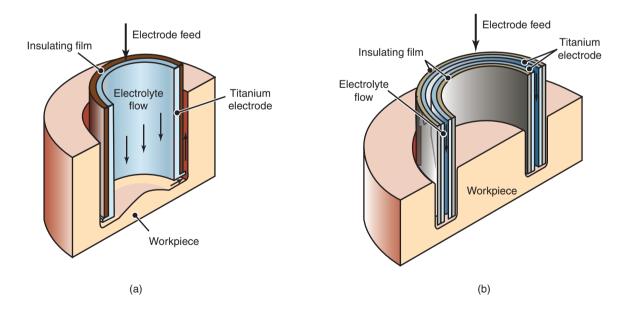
Shaped electrolytic machining operations. (a) Shaped-tube electrolytic machining, used to make small holes with aspect ratios as large as 300:1; (b) electrolytic trepanning, used for larger diameter holes.
